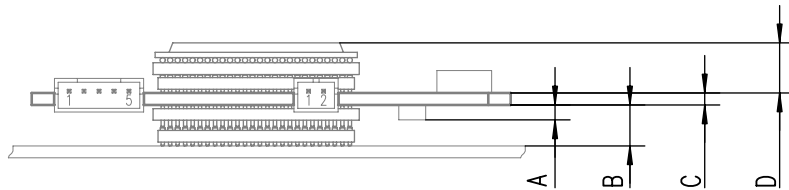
Mechanical Dimensions ETKP7.0: Micro with Socket Adapter mounted
